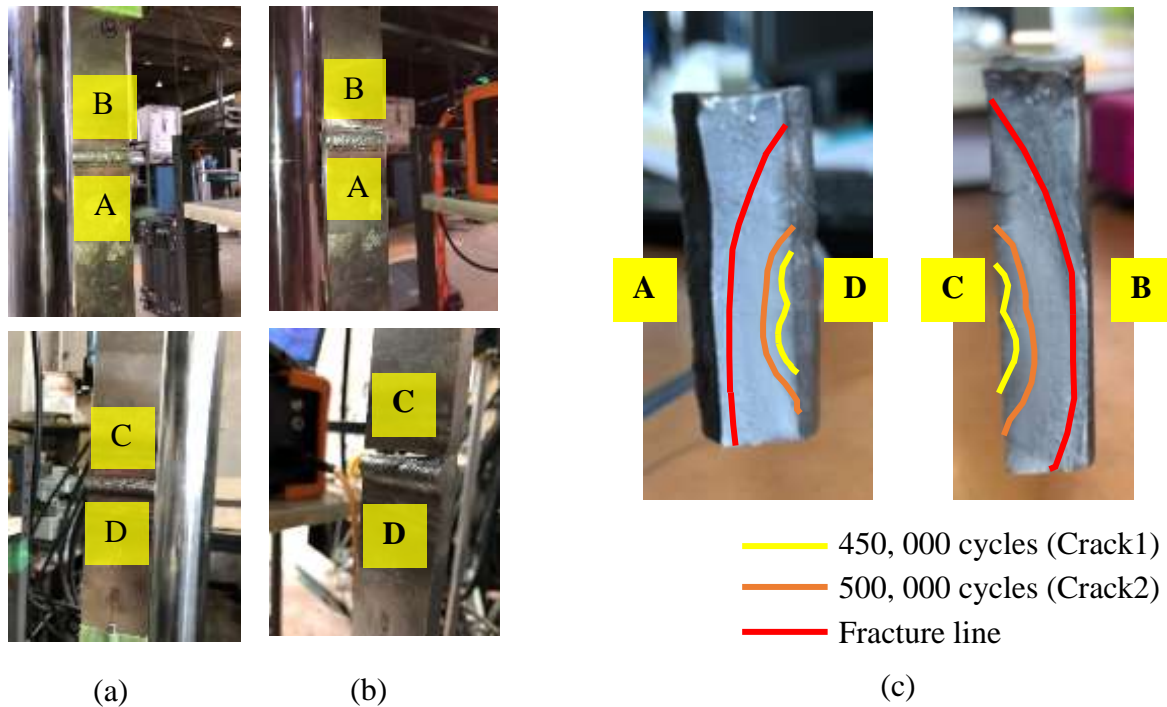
Tensile specimen with butt weld (a) before and (b) after cracking, and (c) Beach marks and fracture surface observed in the cracked specimen.
